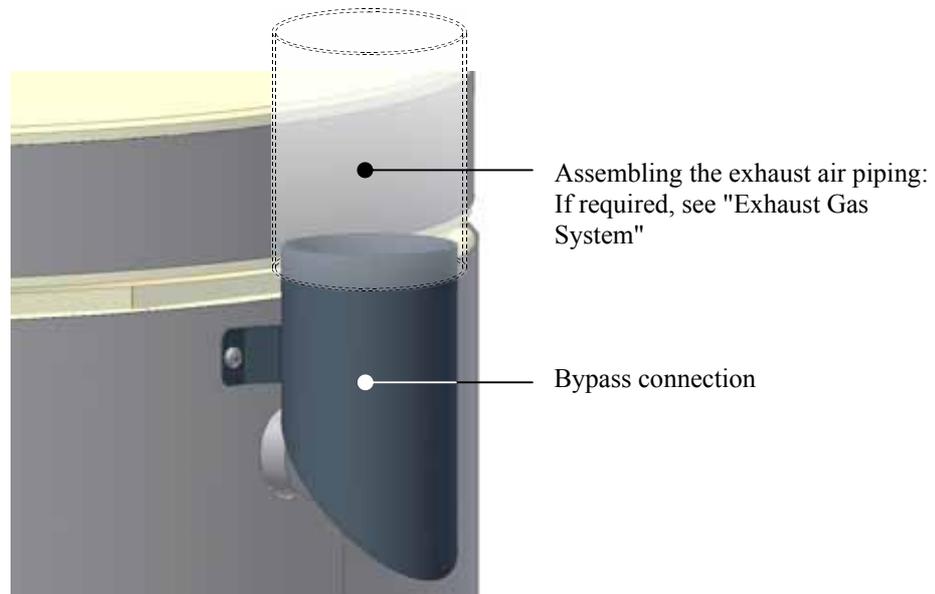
Assembling the exhaust gas piping on the bypass connection
